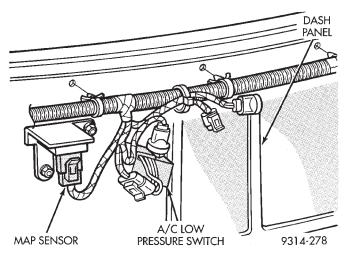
Manifold Absolute Pressure (MAP) Sensor
